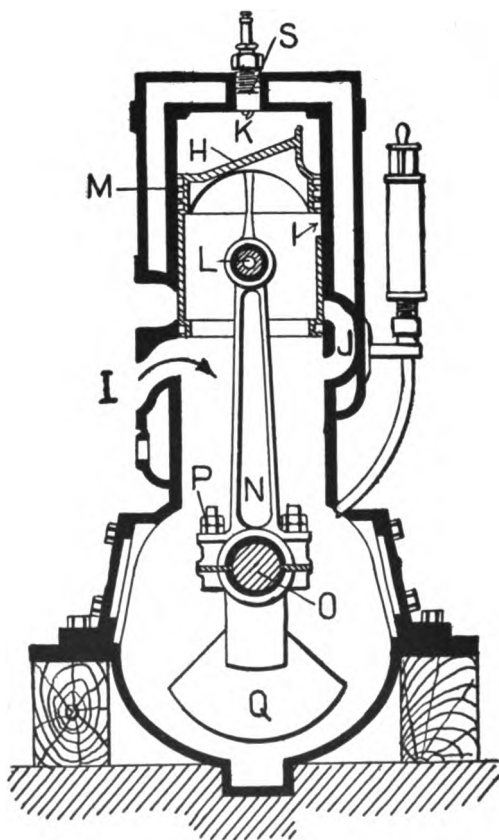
FAIRBANKS GASOLINE MARINE ENGINE.
